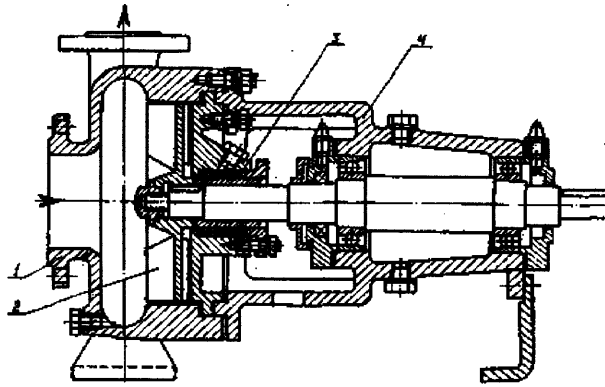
"Turo" type torque flow pump design (1 – casing; 2 - impeller; 3 – end seal; 4 - bearing housing)
